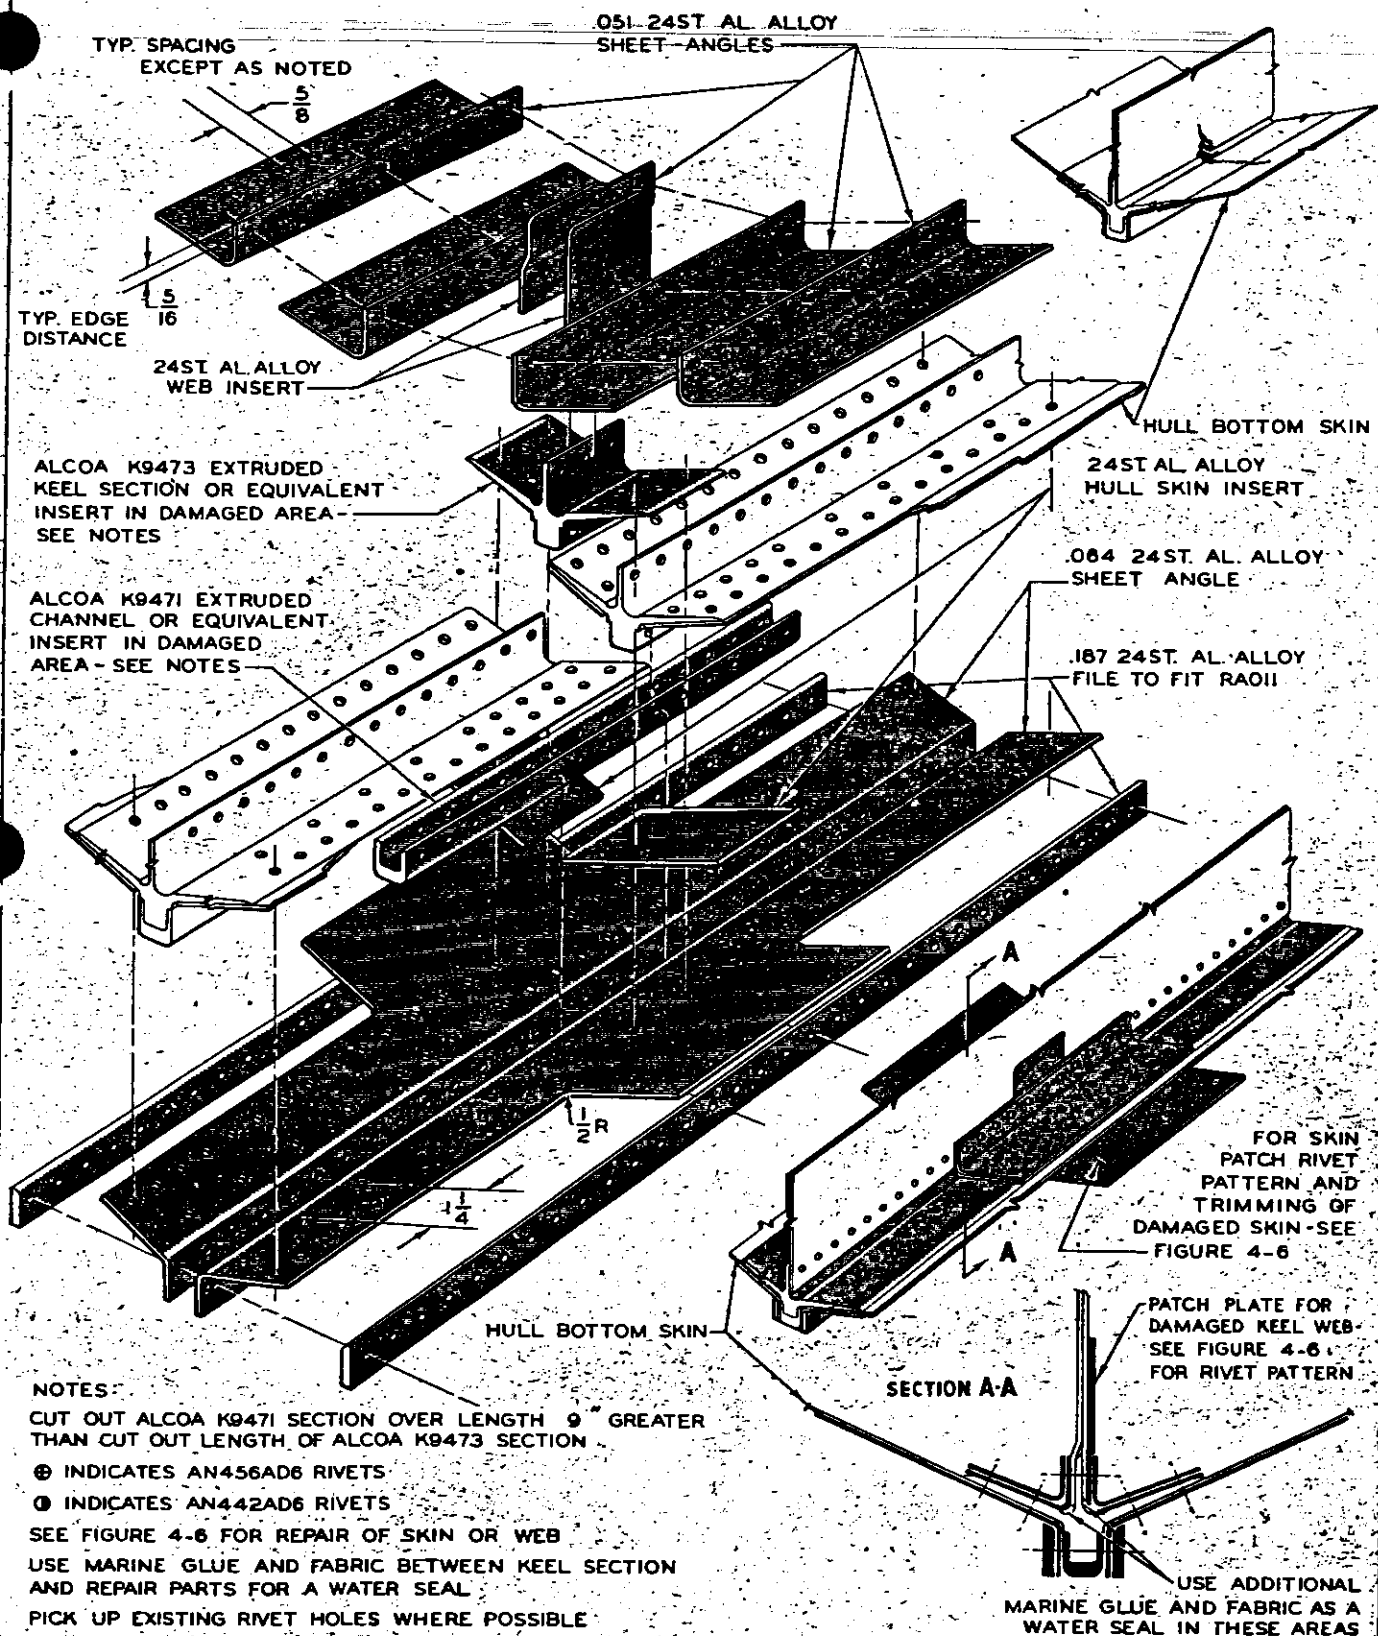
(Sheet 2 of 2 Sheets)—Main Keel Repair
